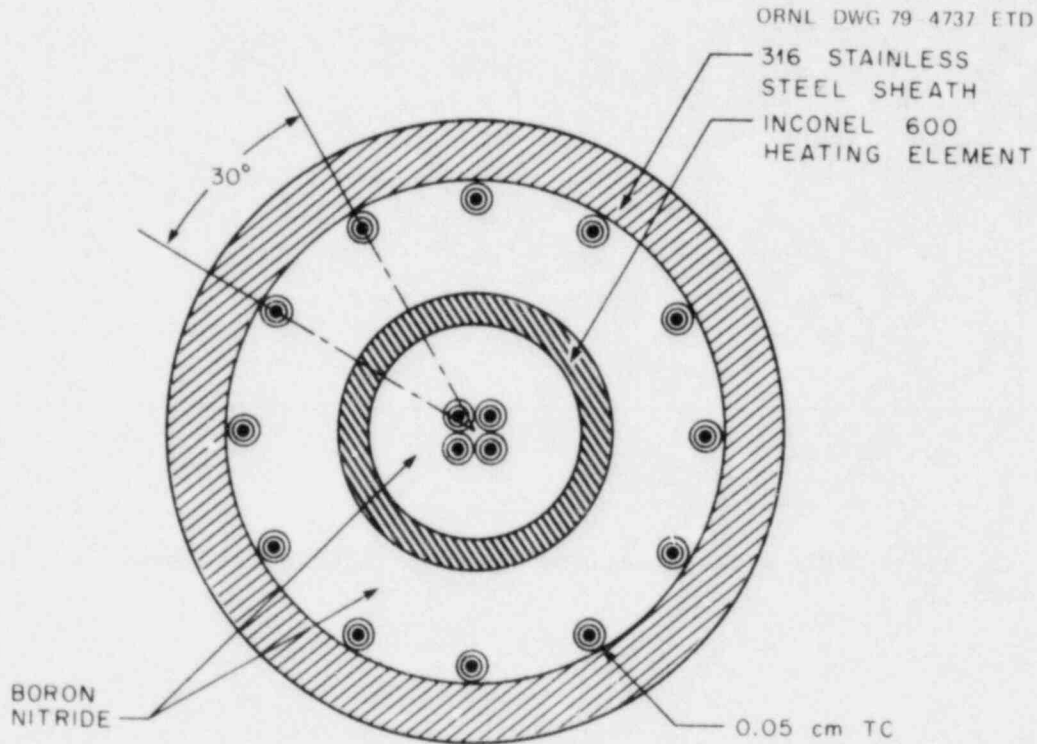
Cross section of FRS for THIF Test 3.05.5B.
